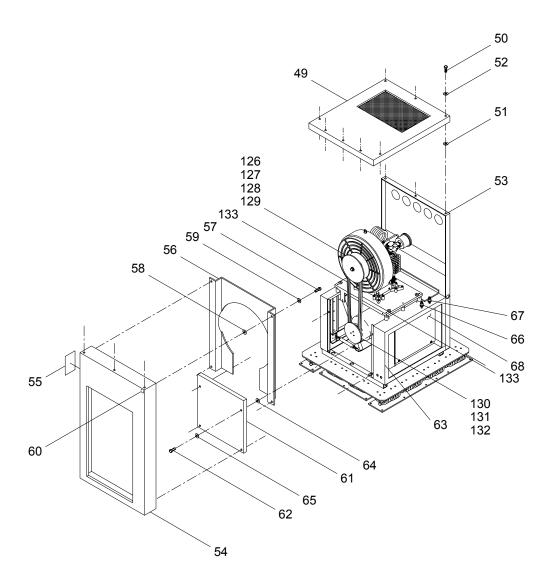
High Pressure Breathing Air Compressor (HPBAC) (Sheet 3)
